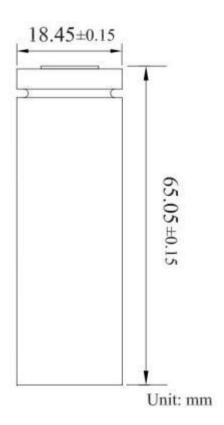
Outline Dimensions of CMICR18650F-3350mAh(with tube)
